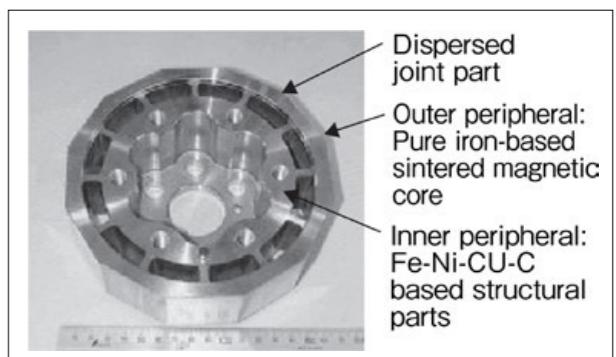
SMC motor rotor core for hybrid vehicles (Courtesy Hitachi Chemical, Japan)
